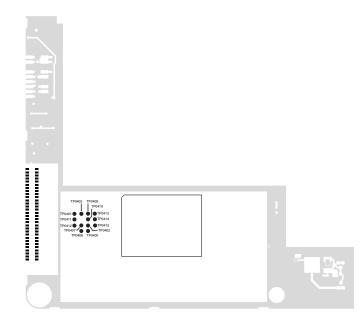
Main Board Test Points—Top Side (for High Power)
